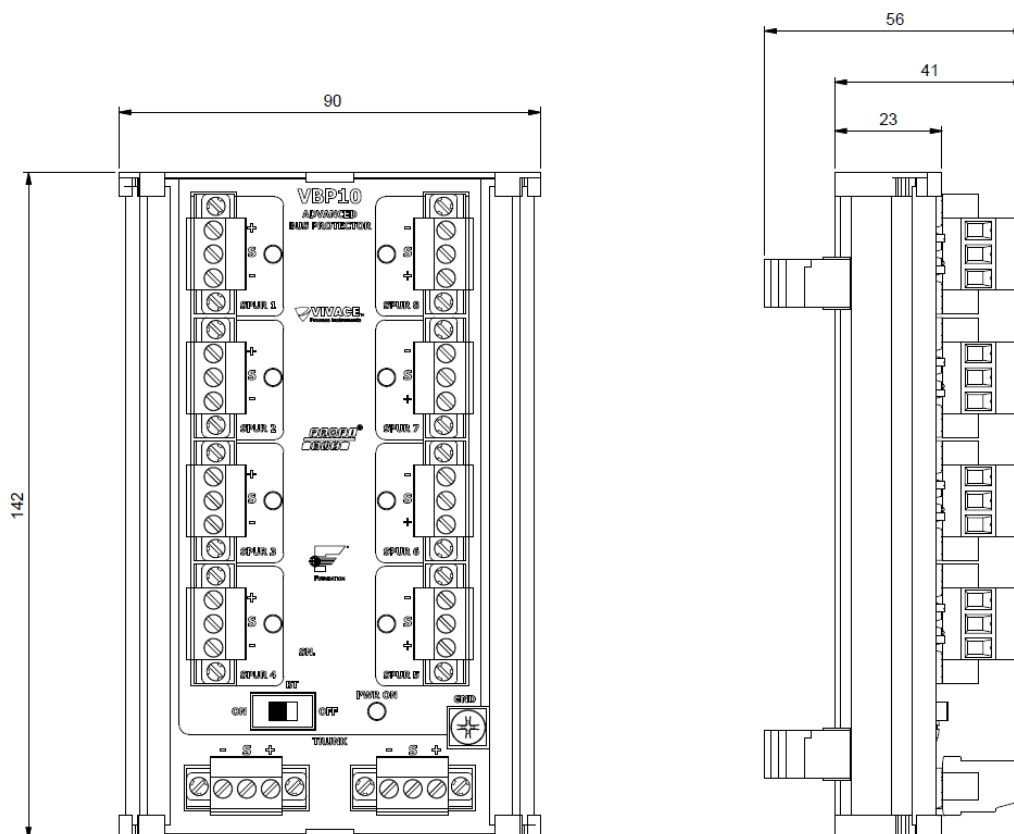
Dimensional drawing for VBP10, 8-channel model.
